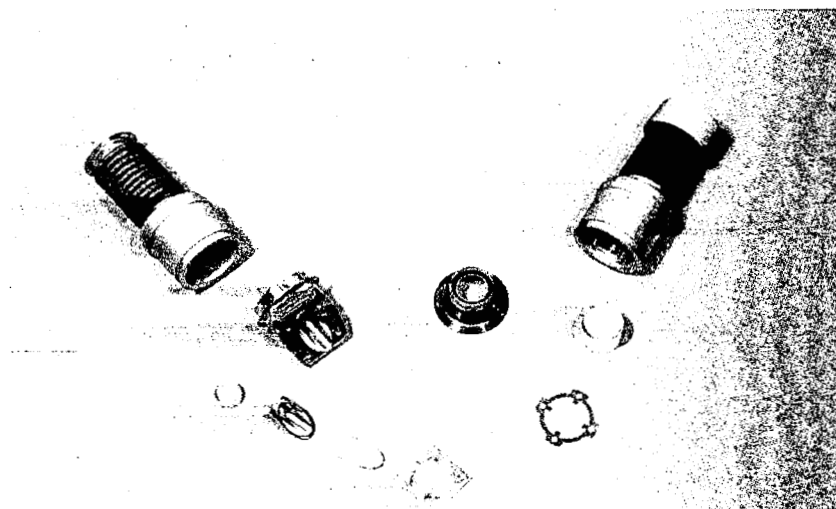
Parts for internal Brewster window-flat mirror assembly, output mirror and output window.
